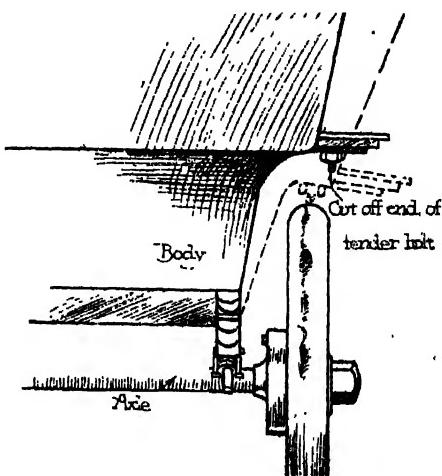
How Tire Tread is Sometimes Injured by Projecting Bolts of Fender Iron if Springs Deflect Excessively.
